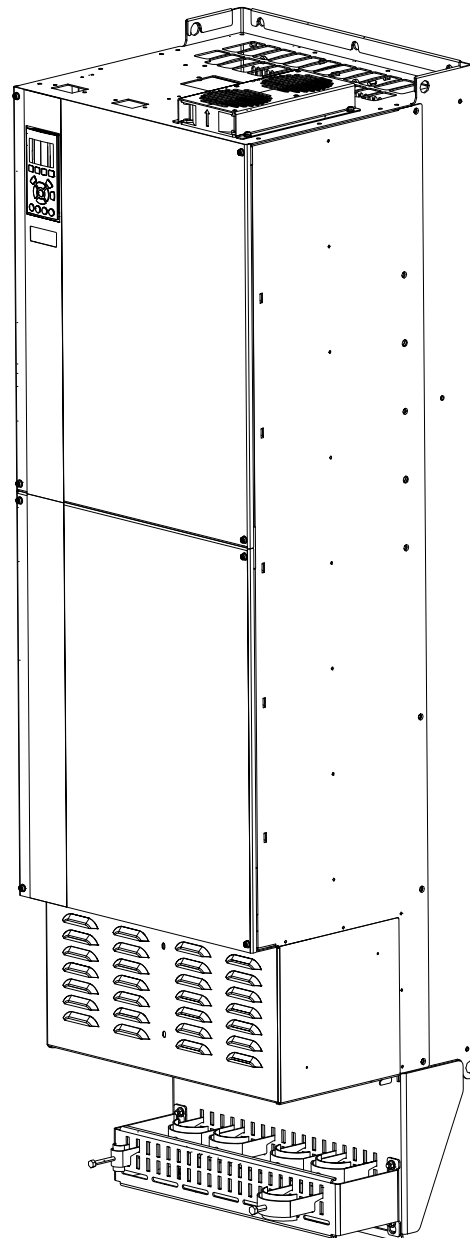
E3h Drive with Cable Clamp Kit Installed
